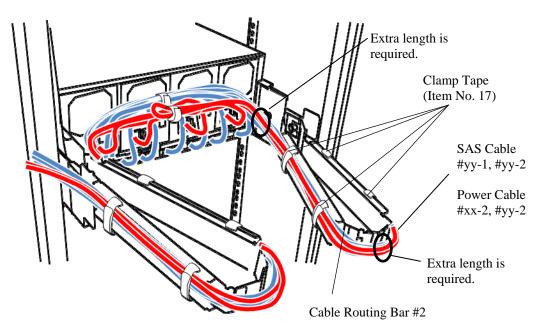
Fixation of SAS Cables (#yy-1, #yy-2) and Power Cables (#xx-2, #yy-2)
